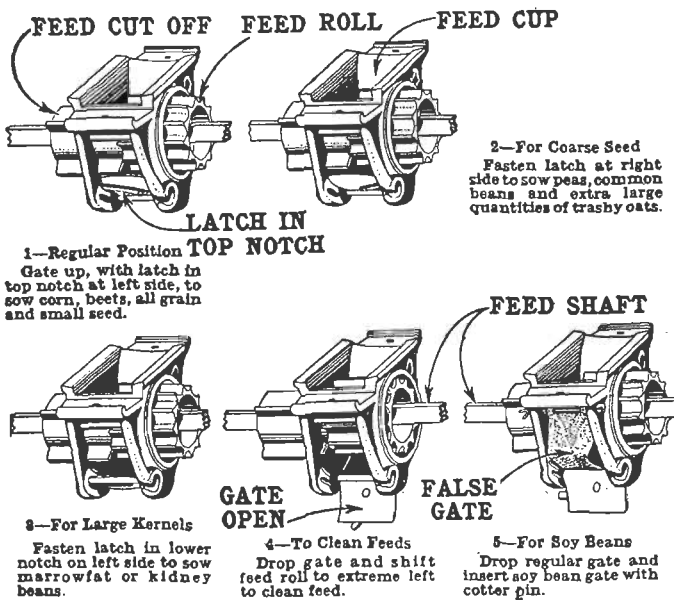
Fluted-wheel grain feed showing the various adjustments.
